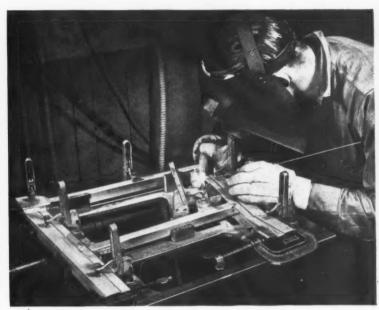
Fabrication of an Aircraft Seat Frame Made from Magnesium, Using the Heliarc Welding Process
